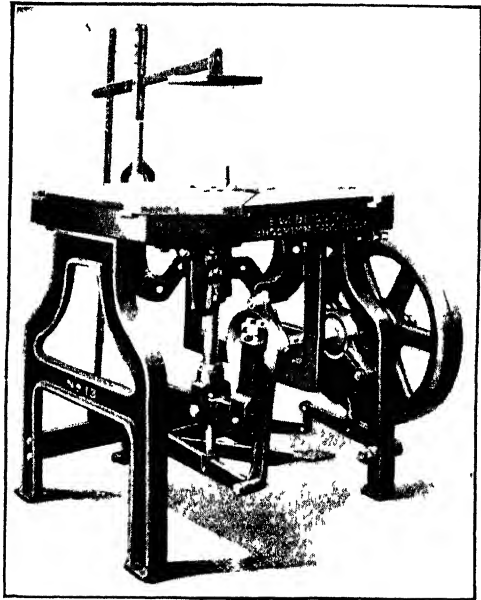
For crimping, beading or flanging operations on rectangular cans, diagonally placed slides contract or contract and expand on the table of such machines.
